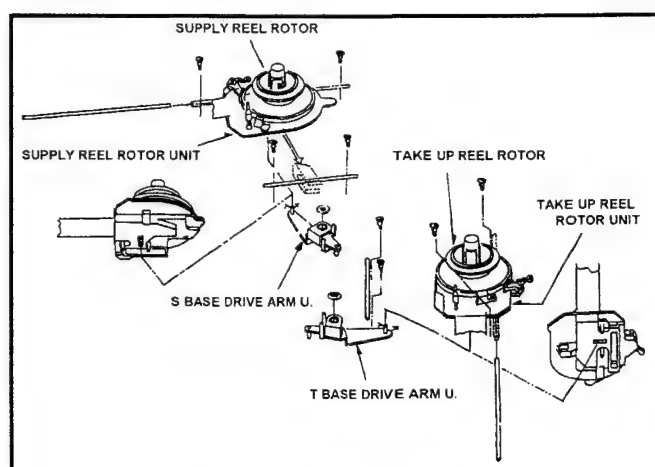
Install of S & T Reel Rotor Unit
